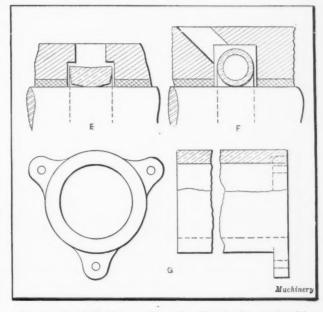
(E and F) Diagrams illustrating Methods of preventing Oil-throwing; (G) Pot Casting from which Oil-rings are machined
